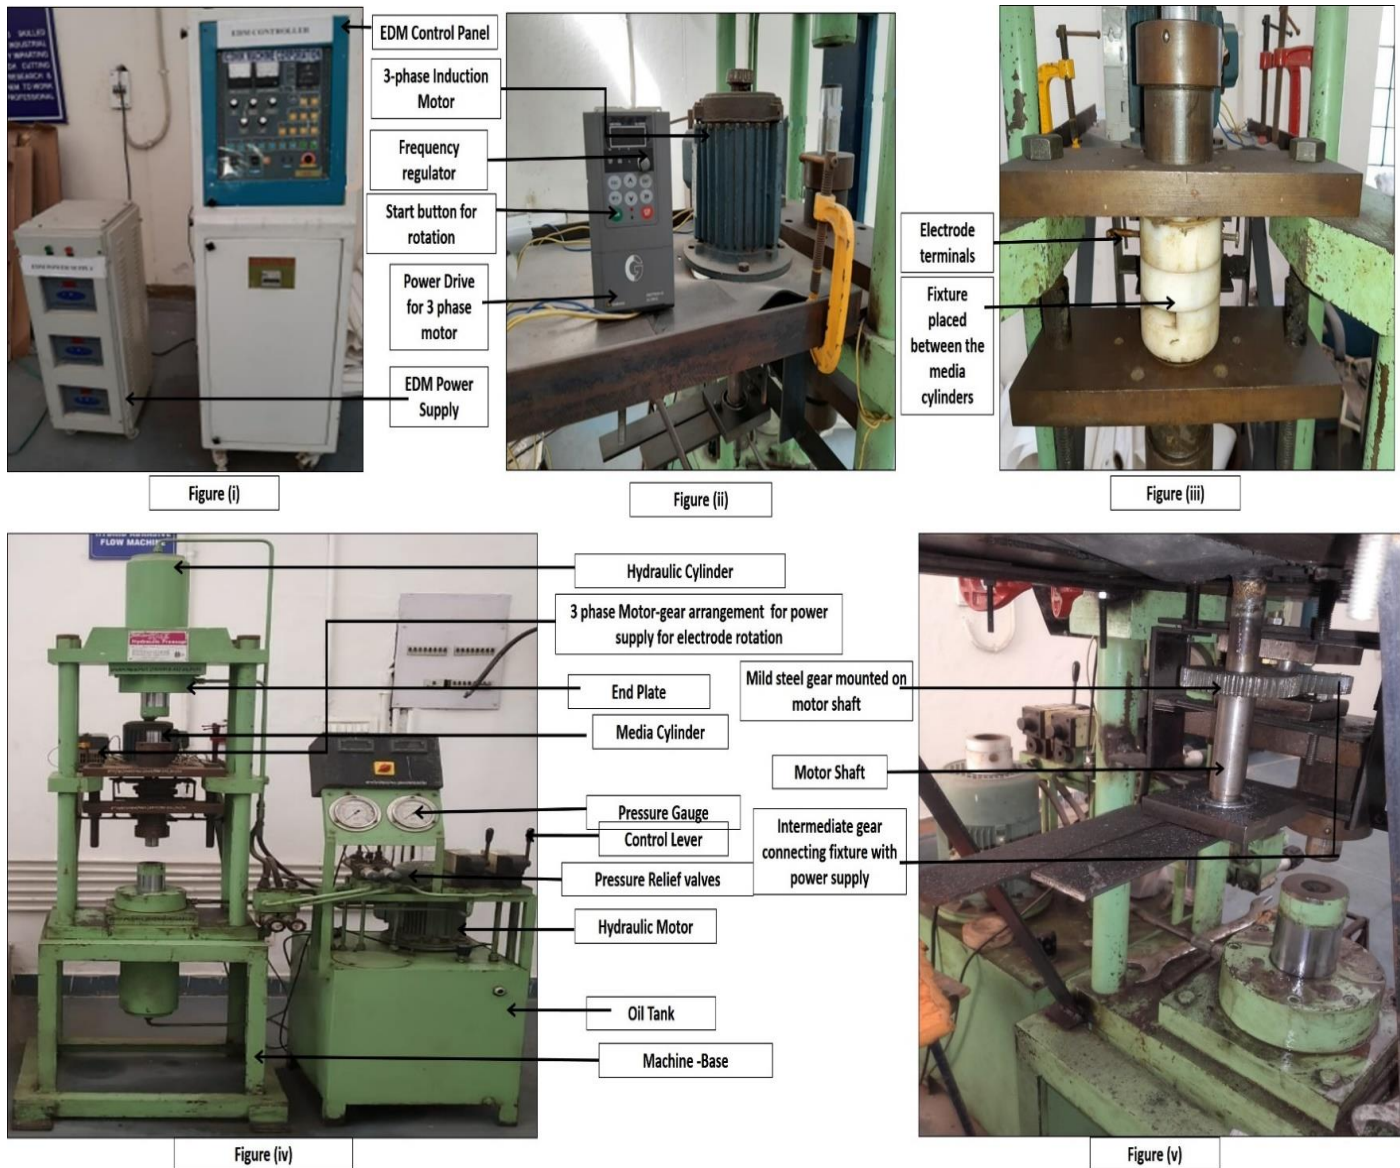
EDM Power supply and EDM Controller (ii) 3-Phase Induction Motor with Power Drive (iii) Fixture with terminal (iv) Conventional AFM Setup (v) Side view
